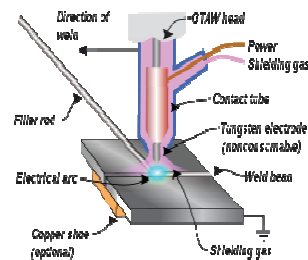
Gas Tungsten Arc welding Process [12]
